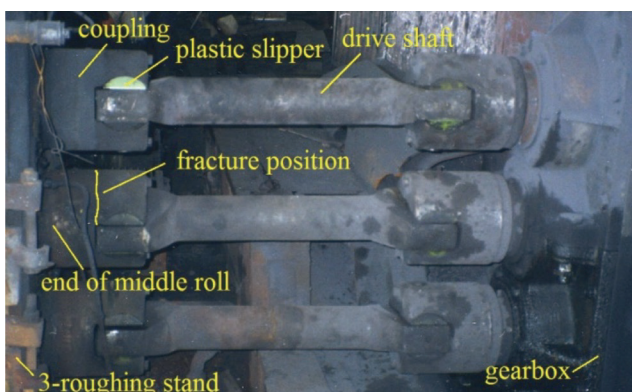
Shafts and couplings between the 3-high-roughing stand and the gearbox
